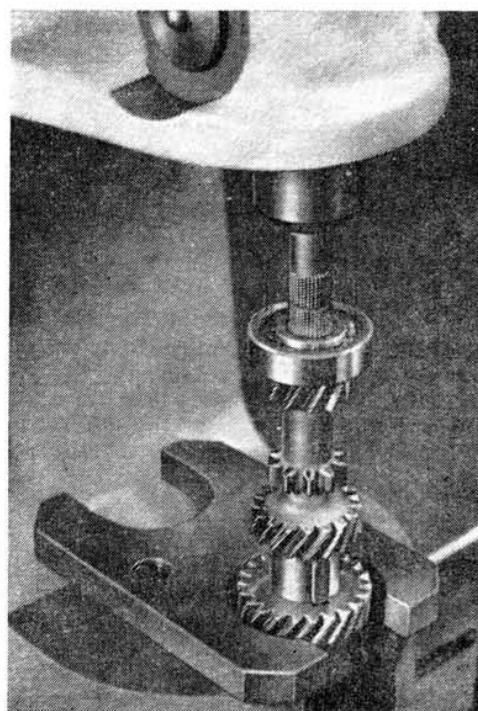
/1 - Shrink-fitting of Gears on Drive Shaft Using MP 3-106 Support (two-part jig consisting of the support proper and the buttress plate)
